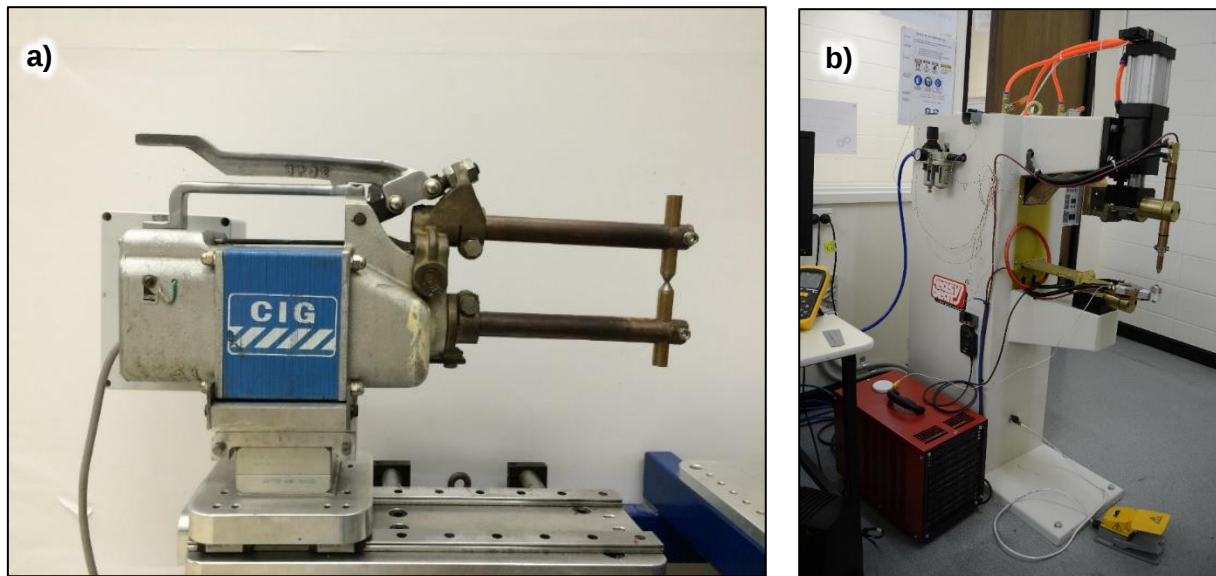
a) CIG portable spot welder at the ANU, b) DN-50K AC pedestal spot welder at the ANU
